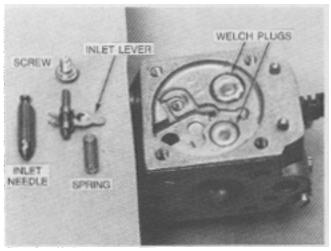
The inlet lever is under spring tension. Remove inlet lever assembly very carefully to prevent loss of spring or other parts.
